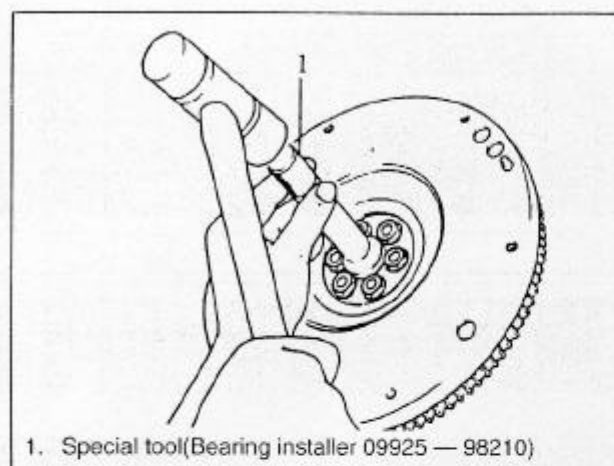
B — 18 INSTALLING INPUT SHAFT BEARING
